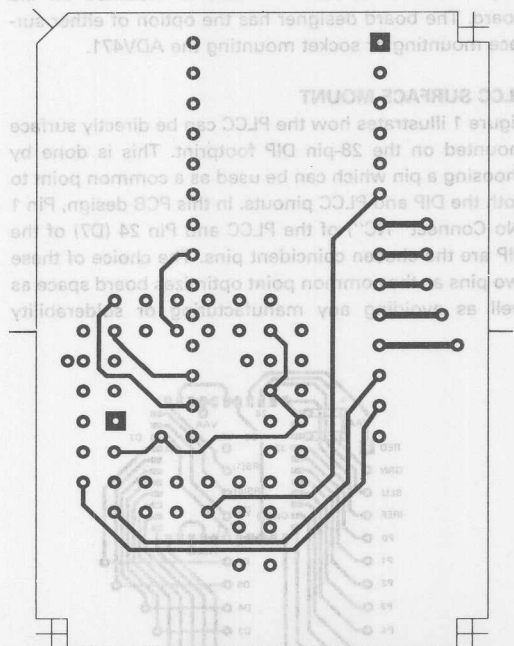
PCB Solder Side Layout Pattern Using Socket Mounted PLCC
